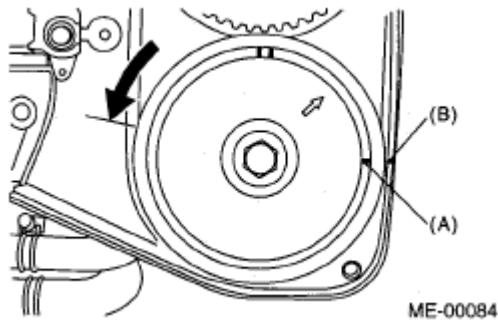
Aligning Single Line Mark On Exhaust Cam Sprocket
